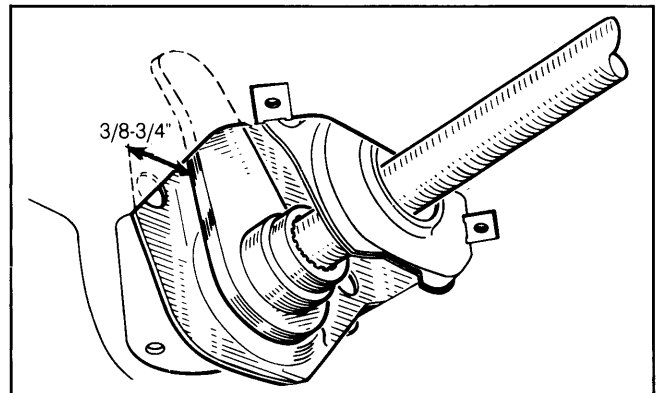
Lower Arm Anchor Sleeve Scribe Mark
